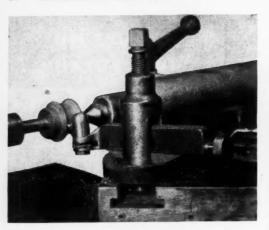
Adjustable Radius-Turning Tool in position for turning a small spool-pulley.
